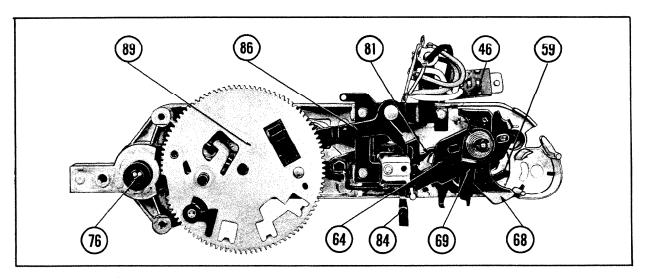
Bottom View Of Cycling Mechanism With Slide Removed.
